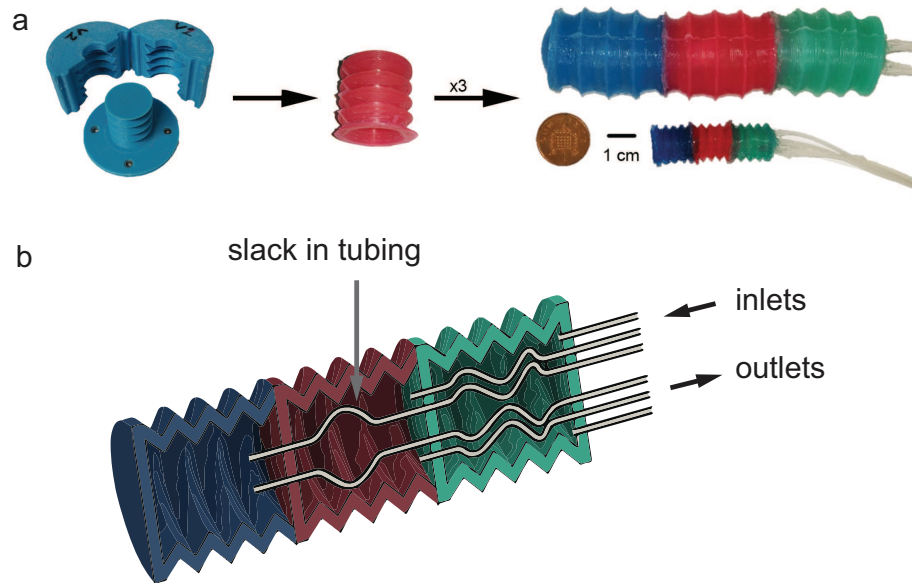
a. Fabrication of the soft robot. Left: 3D printed mould with two halves and a core used to cast the silicone elastomer. Middle: A single HEB actuator chamber. Right: three-segment robot fabricated at different scales. An English penny is shown for comparison. b. Cross sectional view of the robot showing the different chambers. Each chamber was supplied with an inlet and an outlet tube. Sufficient slack was provided in the tubes to allow for free expansion of the chambers.
